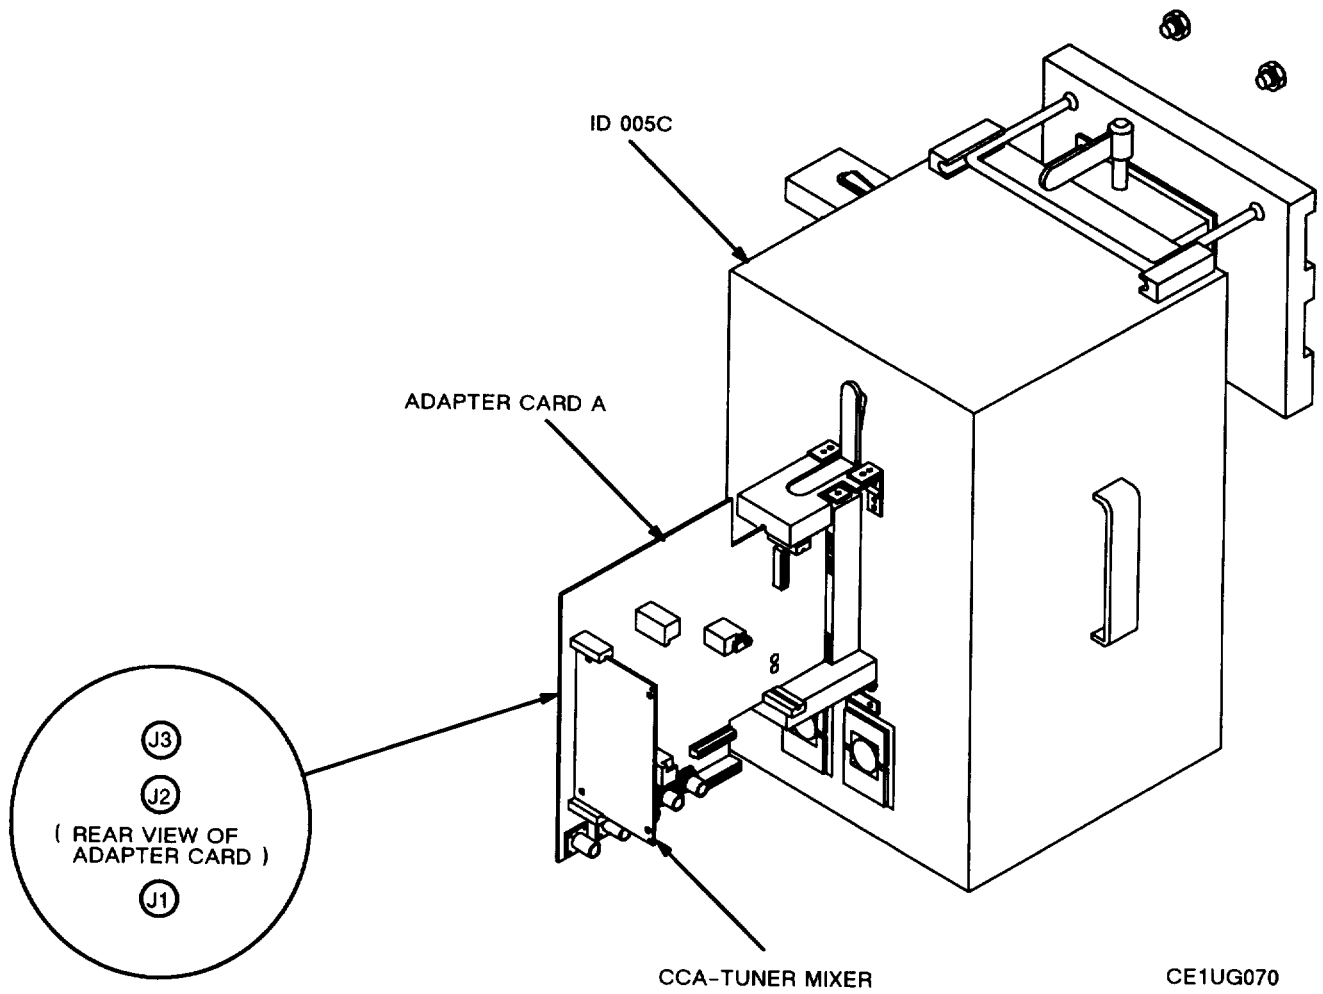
Installation of Tuner/Mixer on Adapter Card A
